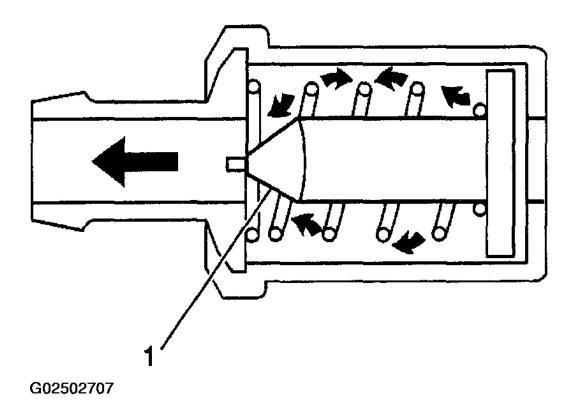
Cross-Sectional View Of Crankcase Ventilation Valve Courtesy of GENERAL MOTORS CORP.
